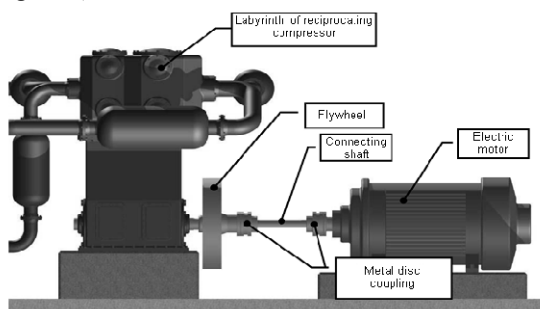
Two-stage reciprocating compressor with metal disc coupling and connecting shaft
